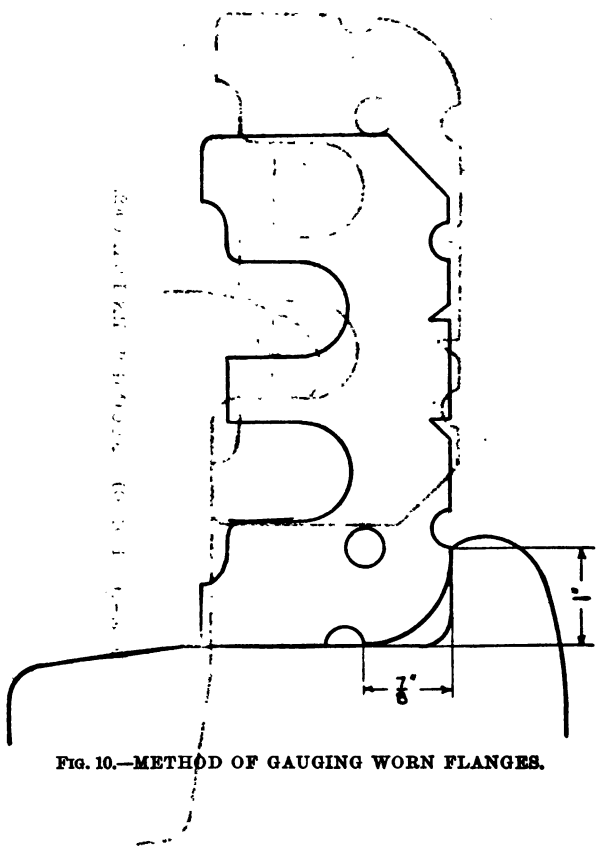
METHOD OF GAUGING WORN FLANGES.
